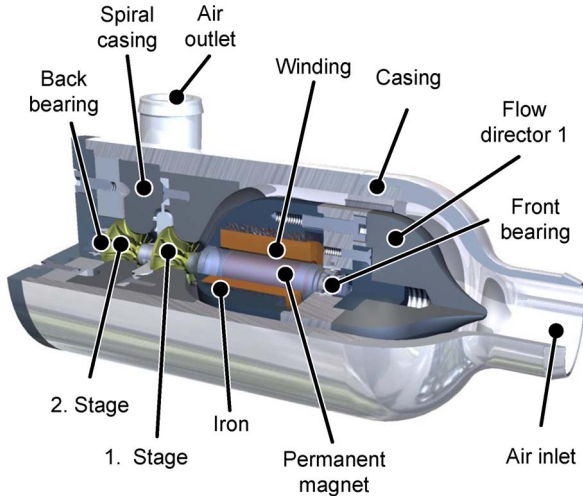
Cross-sectional view of the integrated two-stage electrically driven turbocompressor system.
